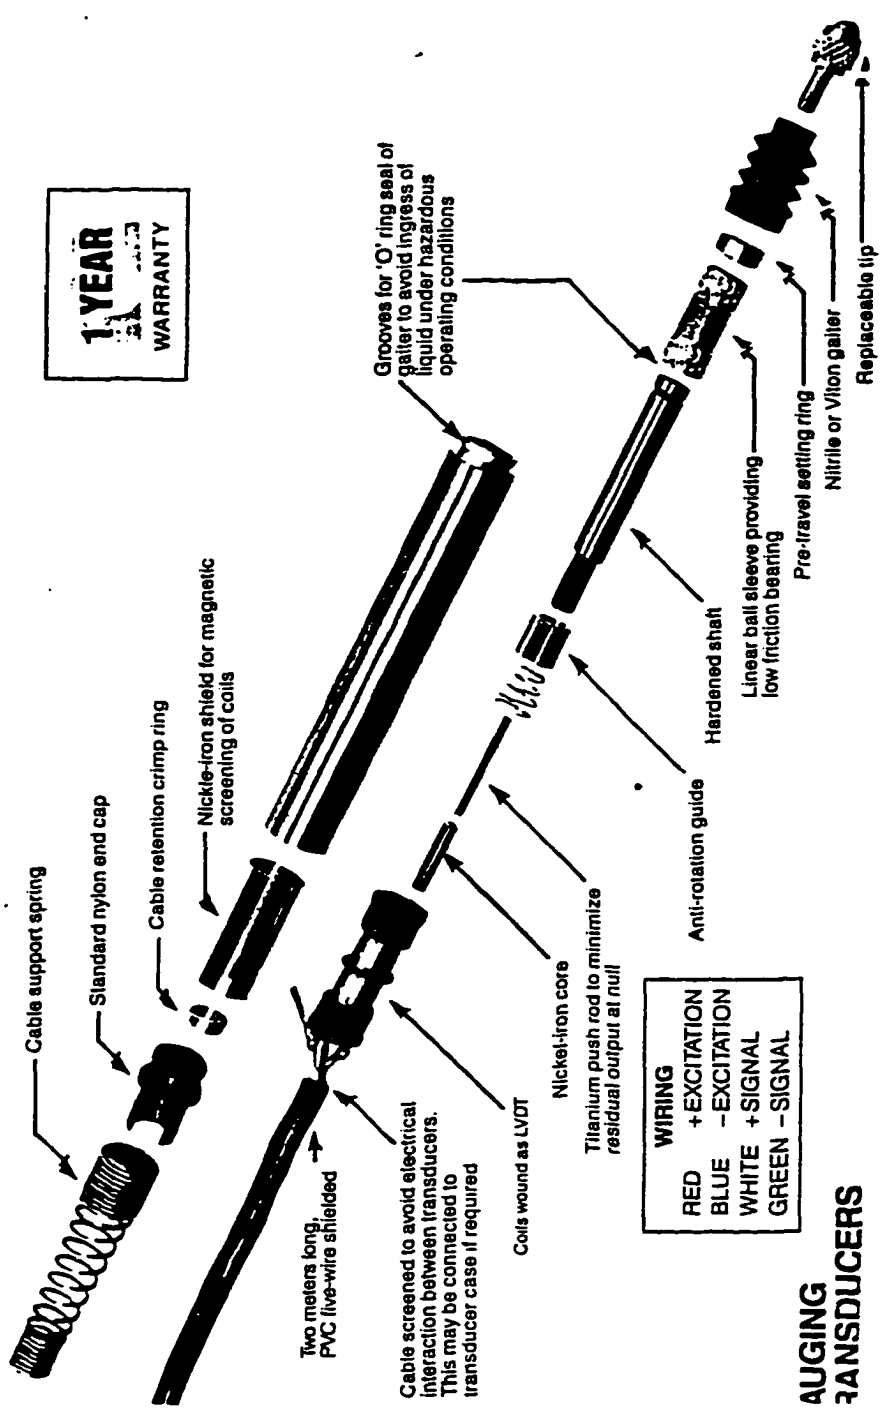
A typical OMEGA LVDT showing disassembled pieces [34]
